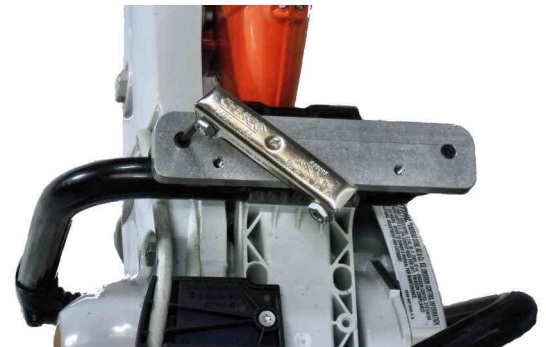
Installation of Front Mount Bracket. Remove saw's flat surface of bracket mounts to the saw, tapered edge points towards rear saw, tighten securely using M5 screws (2, included).
